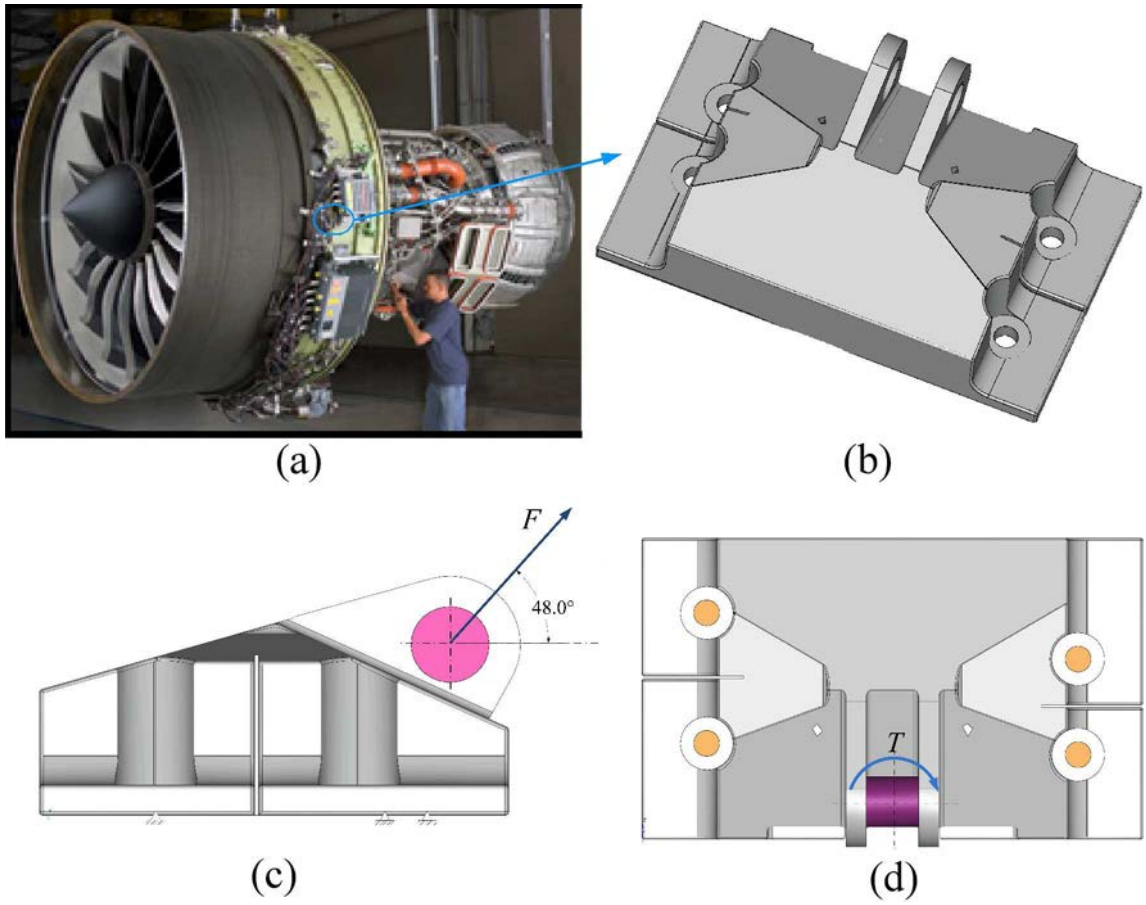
A jet engine bracket; (a) a jet engine; (b) isometric view; (c) lateral view; (d) top view
